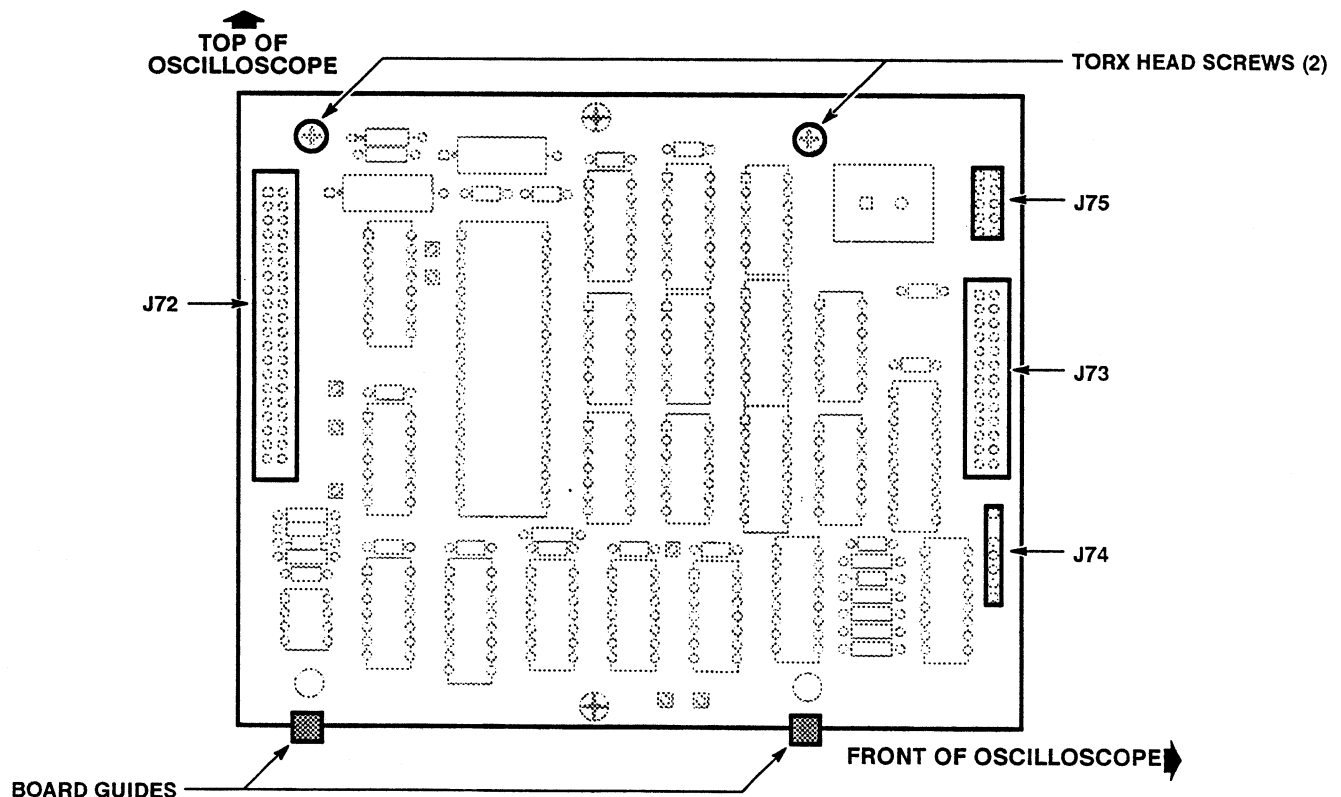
Removing and Replacing the A10 Front Panel Control Board
